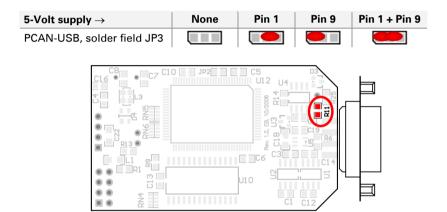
Bottom side of the PCAN-USB opto-decoupled board (IPEH-002022), solder field R11
